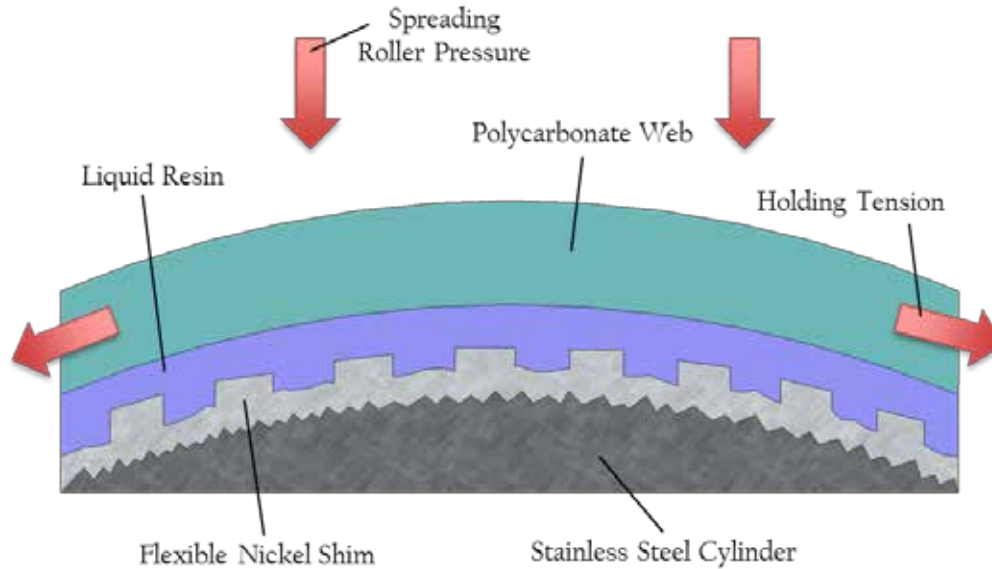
Schematic showing a cross-section of the imprint stack under pressure across the UV roll-to-roll nanoimprinting system imprint roller. The brushed grinding finish of the stainless steel cylinder is partially transmitted through the nickel shim mould. The dispensed liquid resin conforms to this surface and is solidified with this contour upon UV curing, obtaining the resin mould surface waviness found in AFM section measurements.
